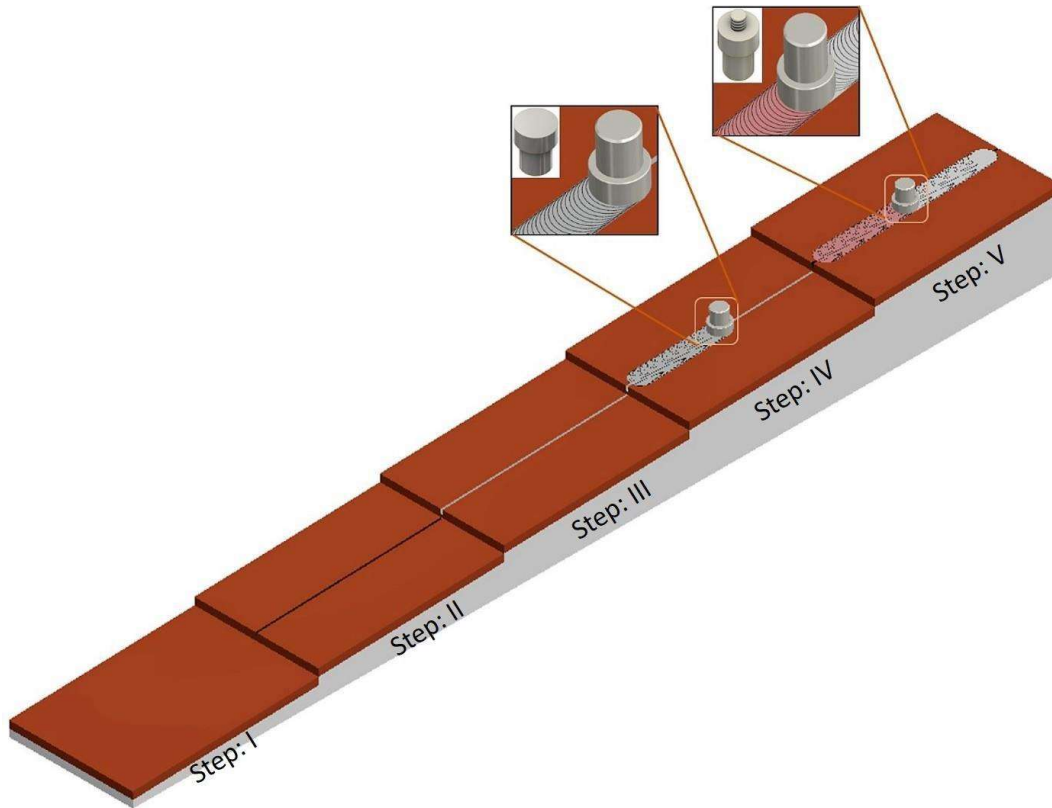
5 Schematic views of FSP process in steps: I Plate of known dimension
